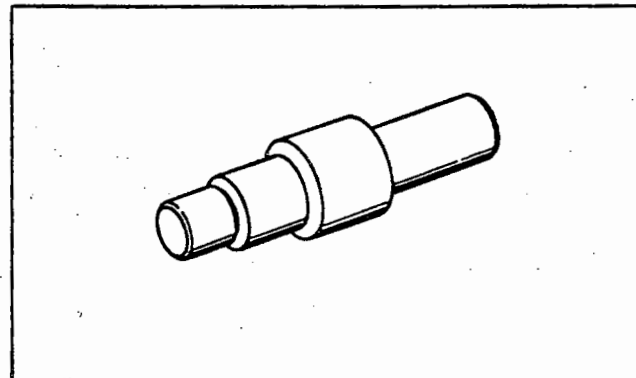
T27278 Throttle Shaft Bushing Mandrel
